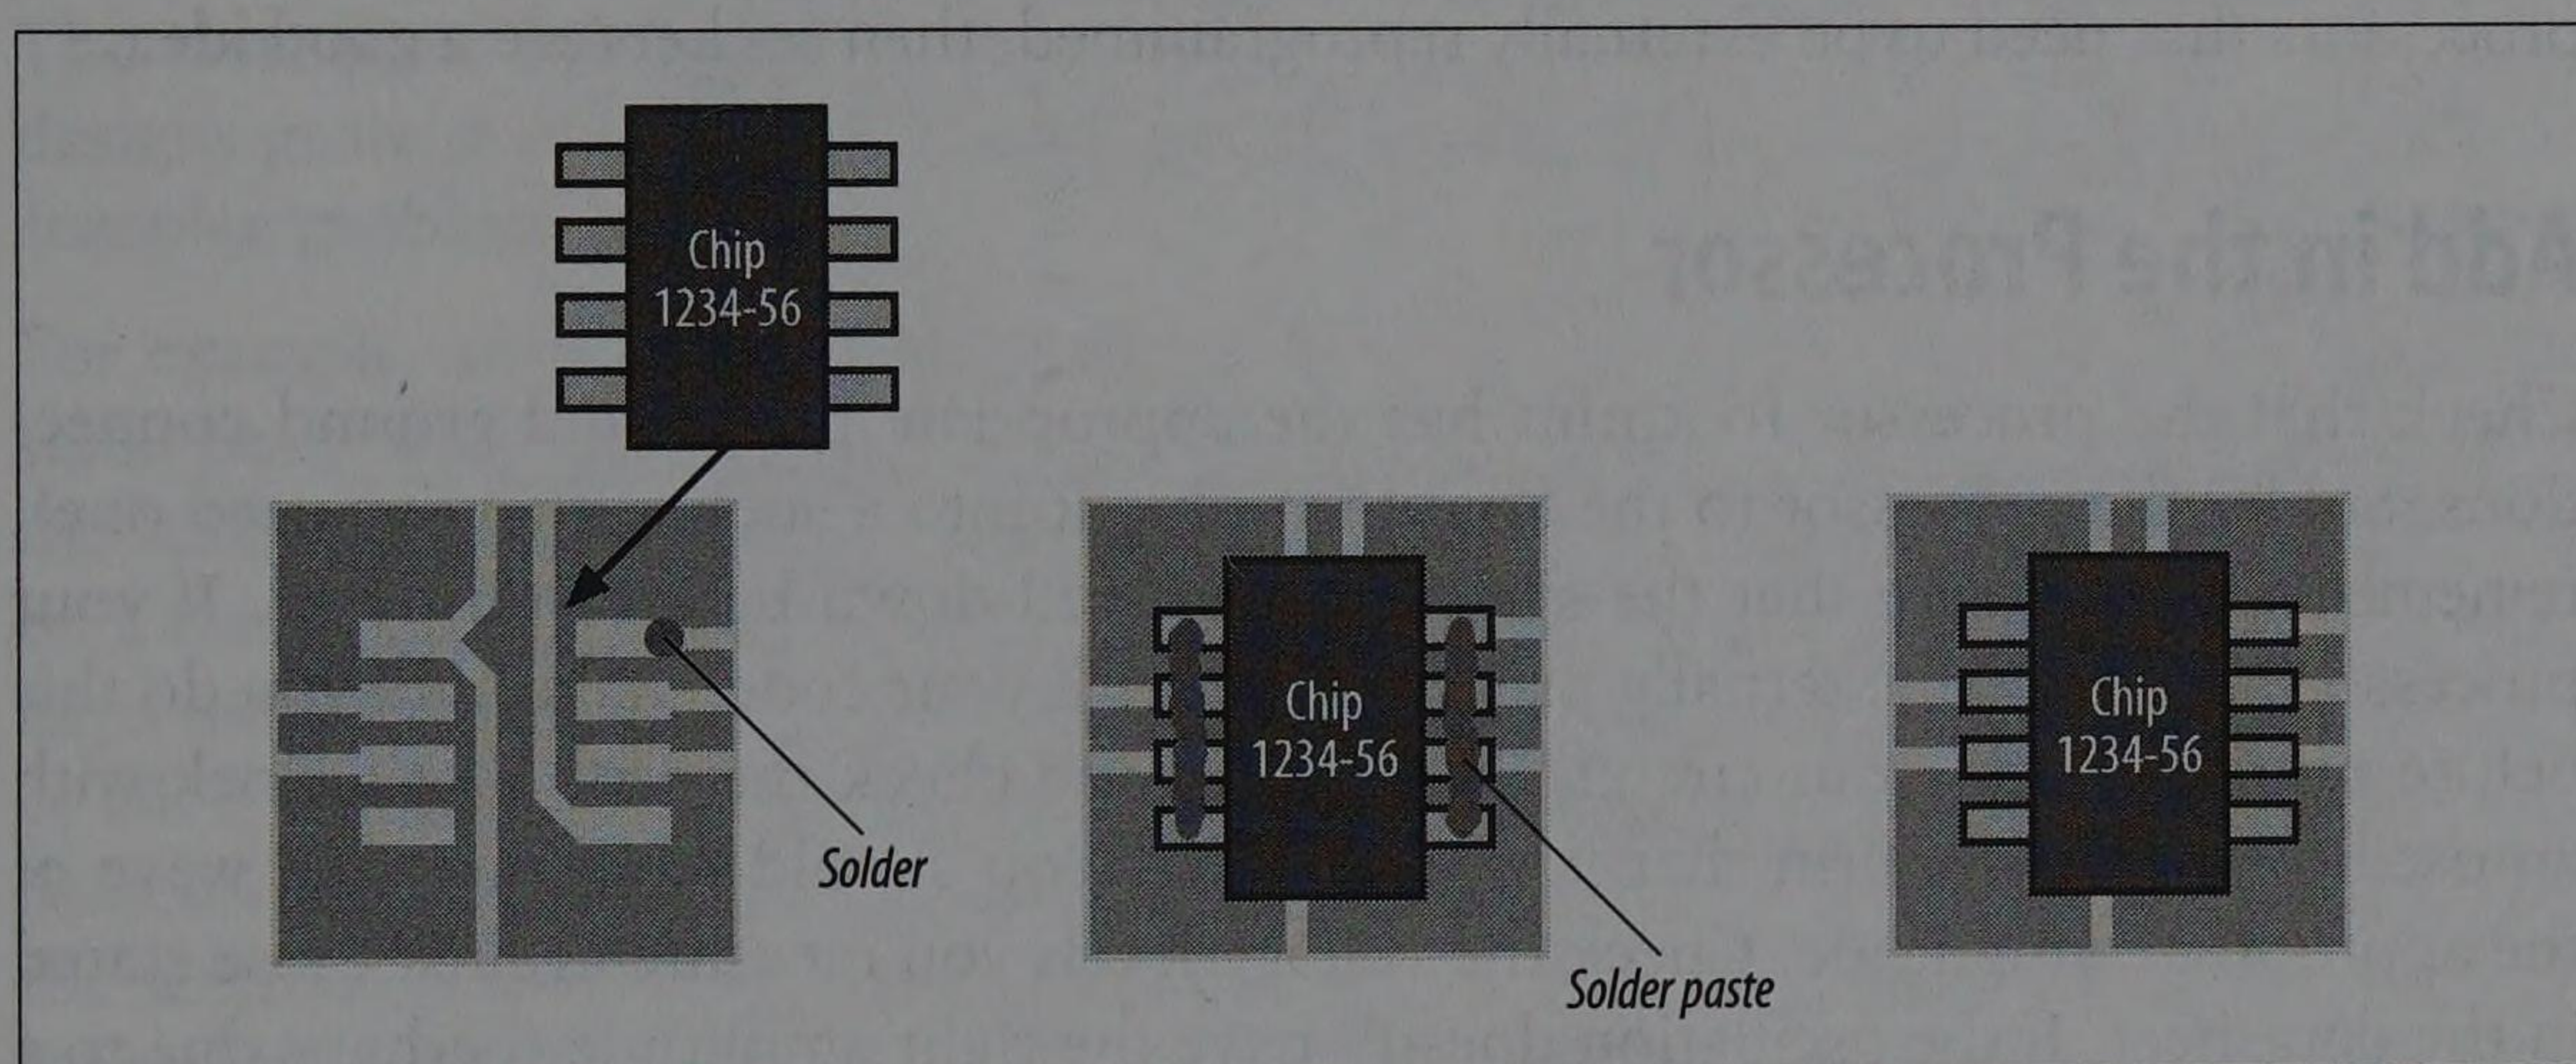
Soldering surface-mount components using a standard soldering iron
